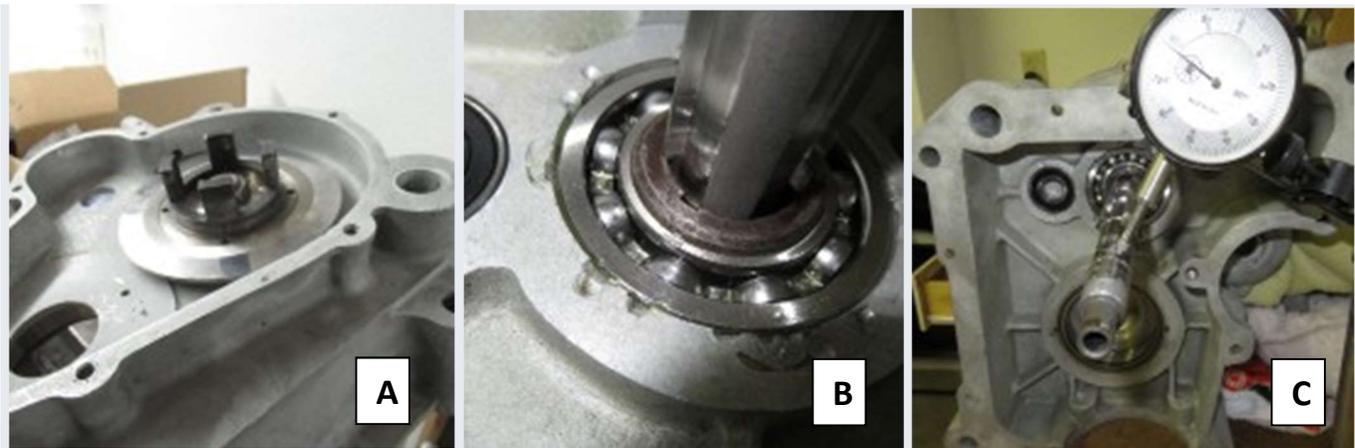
How you must assemble the gear change into the left half of the crankcase.
